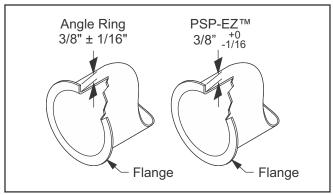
Flange Height Dimensions & Tolerances
